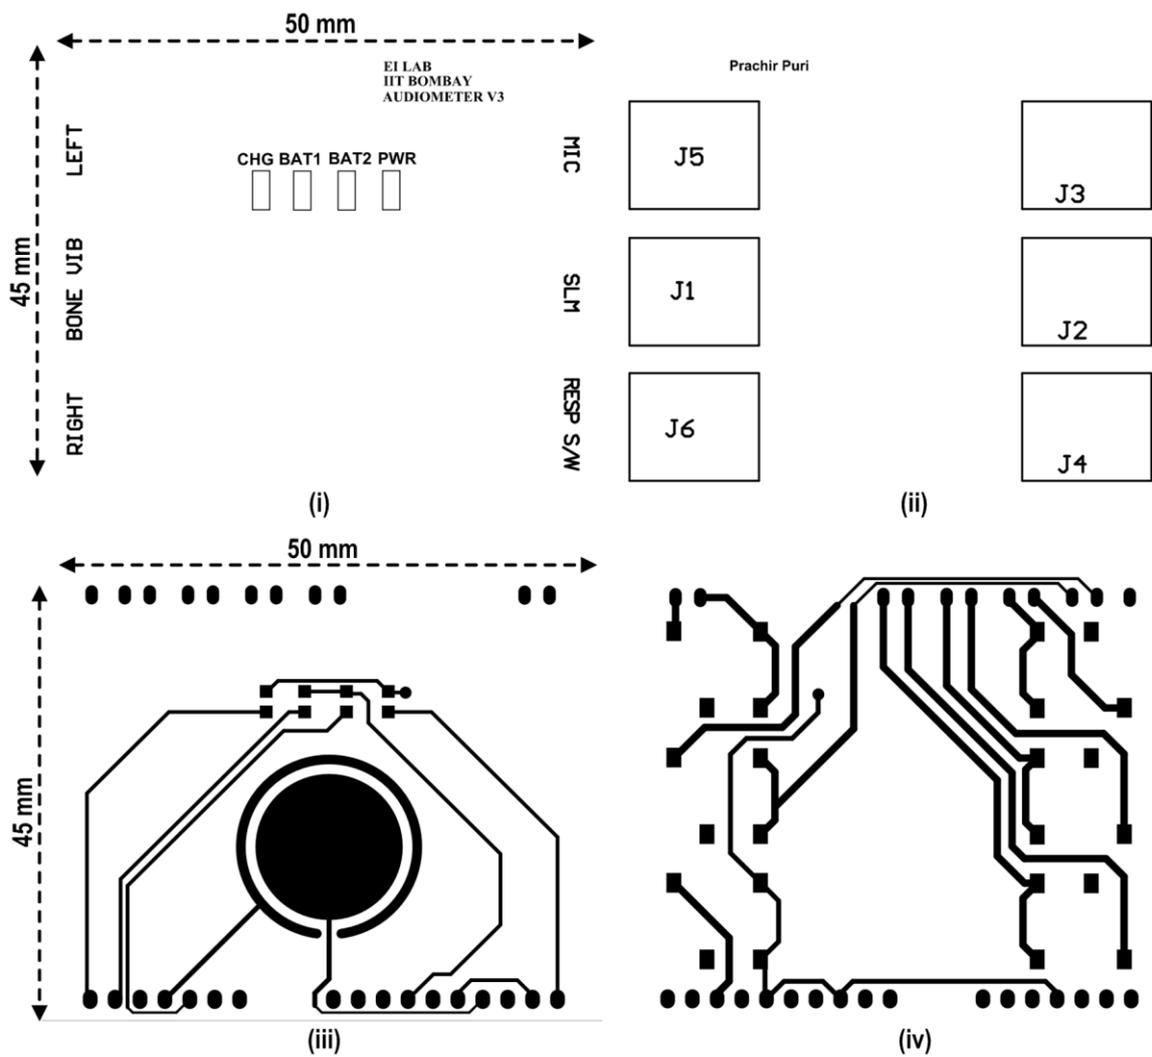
PCB layouts: (i) Top overlay, (ii) bottom overlay, (iii) top layer, and (iv) bottom layers of the 2-layer PCB design.
